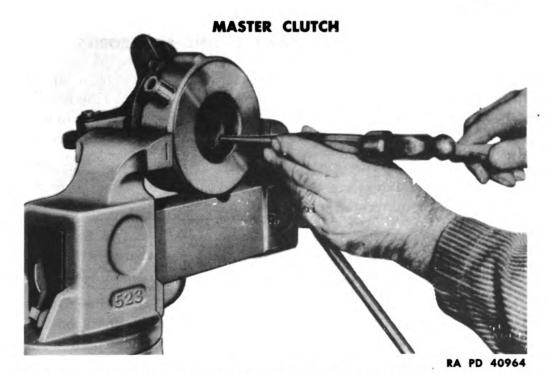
Removing Release Bearing Carrier from Sleeve Assembly
